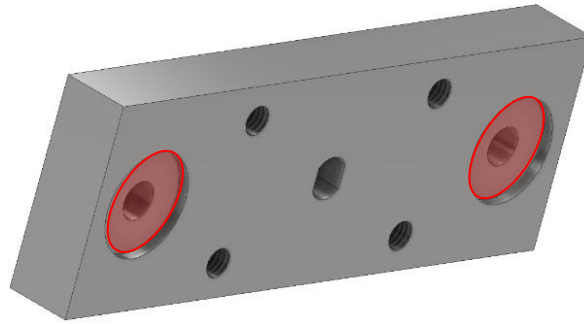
Rear view of the connecting plate with highlighted in red the two counterbore holes used as FEM's constraints.
